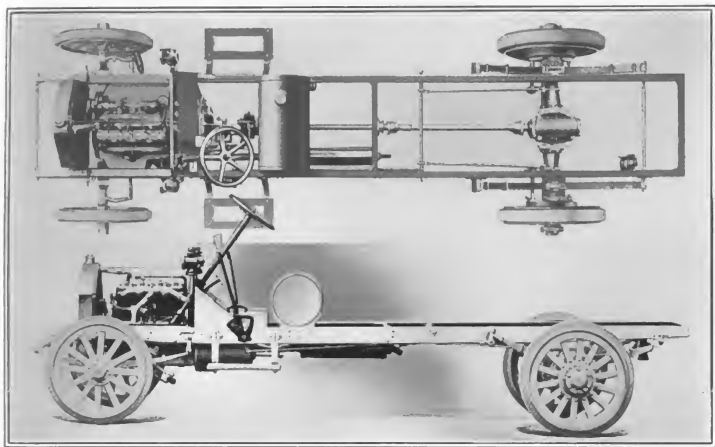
Chassis views of 1½-ton worm-driven Stegeman, showing clean chassis lines and long springs, rear spring shackled in front instead of behind
